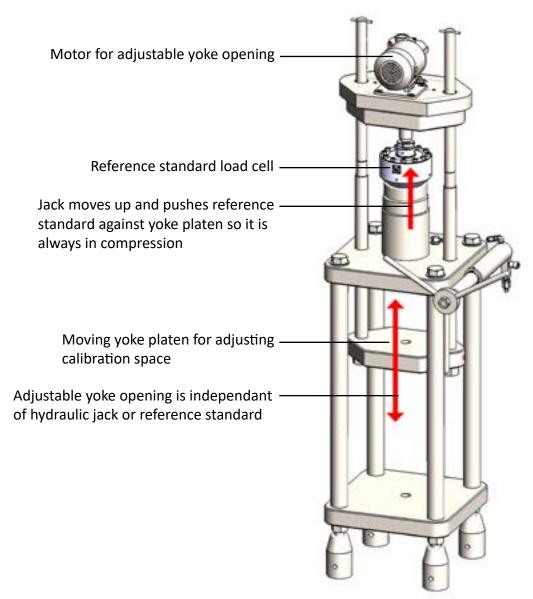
Easy Operation of the Universal Calibrating Machine (UCM)
